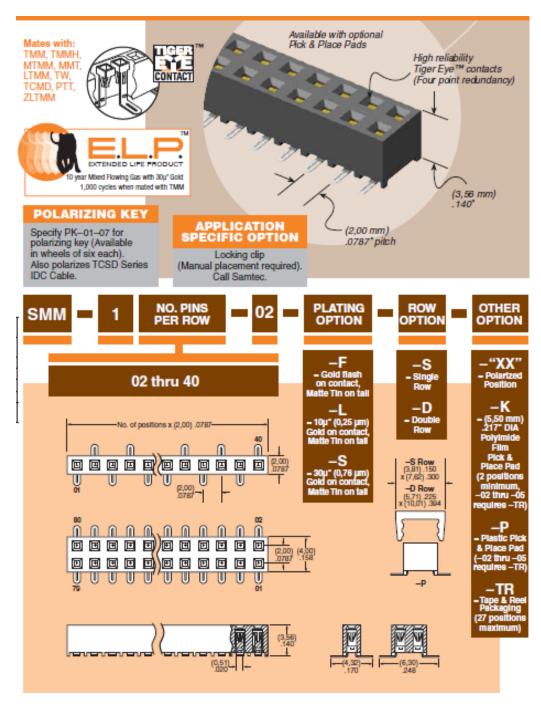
SMM Board-to-Board Electrical Connectors (image courtesy of http://www.samtec.com/technical-specifications/Default.aspx?SeriesMaster=SMM)
